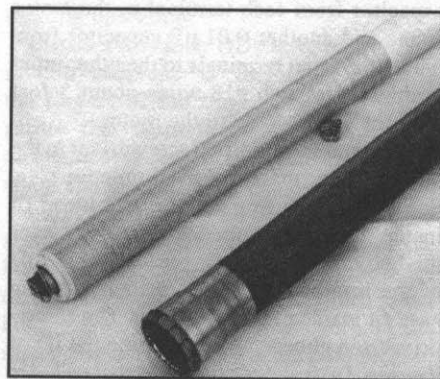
Photograph of the 2-inch copper pipe bottom section and the coil. Fingerstock is soldered to the bottom of the coupling in the copper pipe to make contact with the coil.
